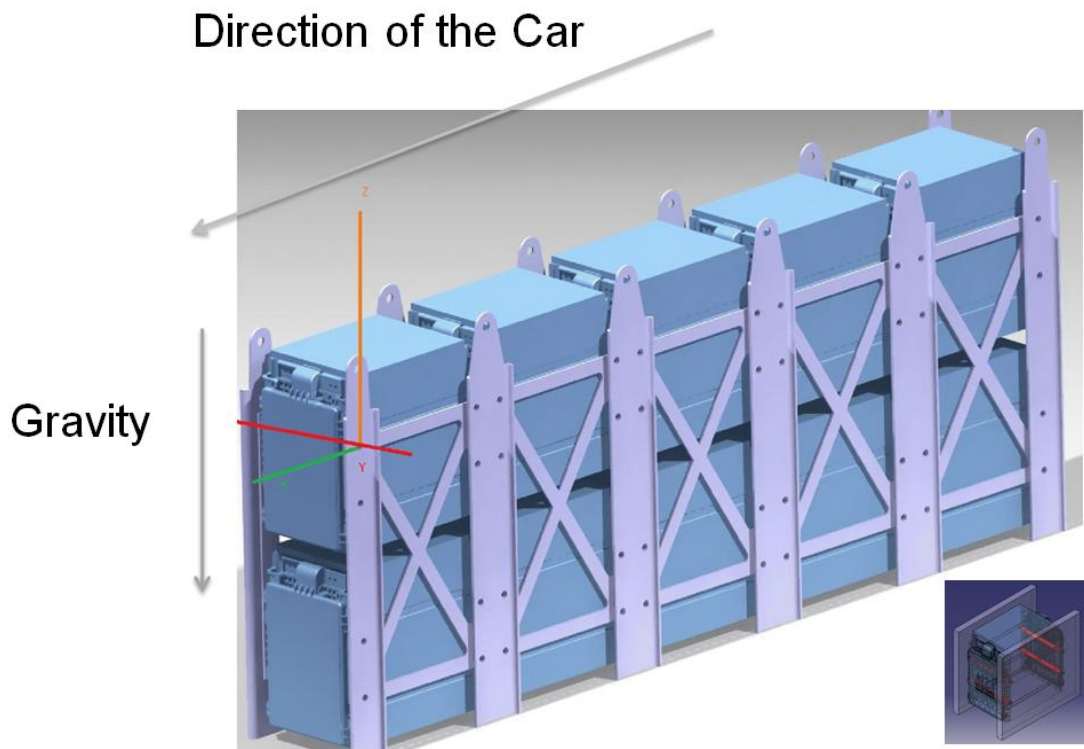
Multi Element Laser-Cut and Riveted Sheet Metal Packaging Design Concept
